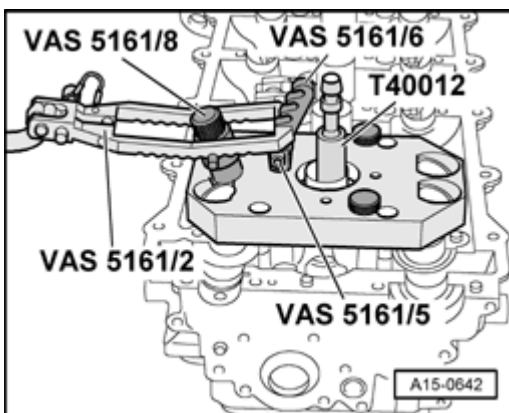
Installing Engaging Device VAS 5161/6 With VAS 5161/5 Into Guide Plate VAS 5161/7
